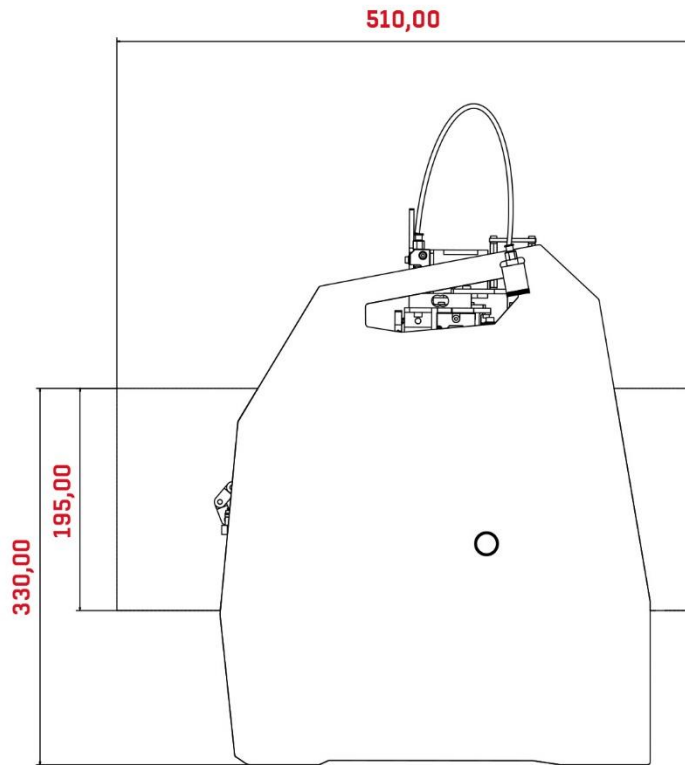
The maximum dimensions of the printer taking into account the extreme positions of the heatbed – right side view
